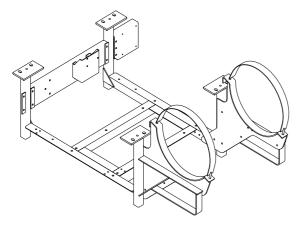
Engine Frame Assy Mid Mount SB330G
